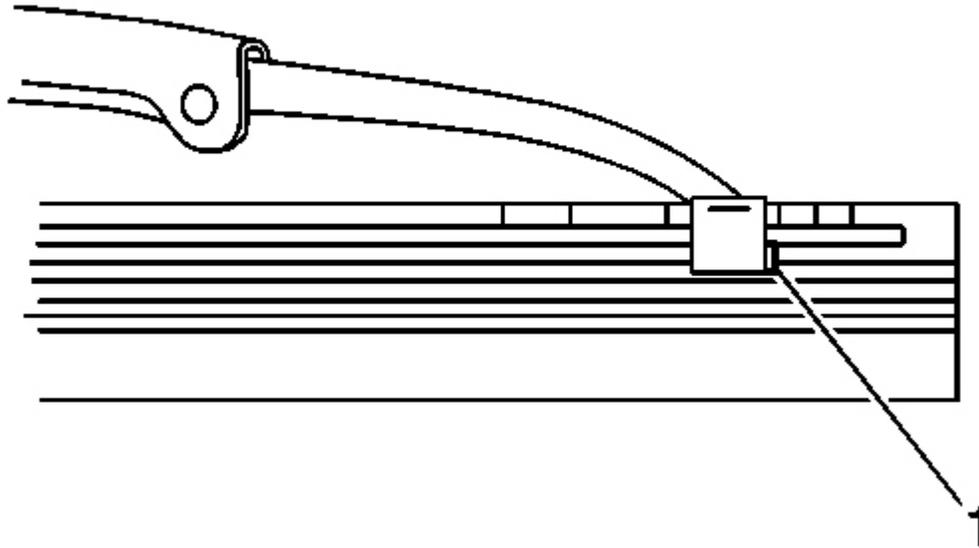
Heel End Of Wiper Blade At Wiper Arm
